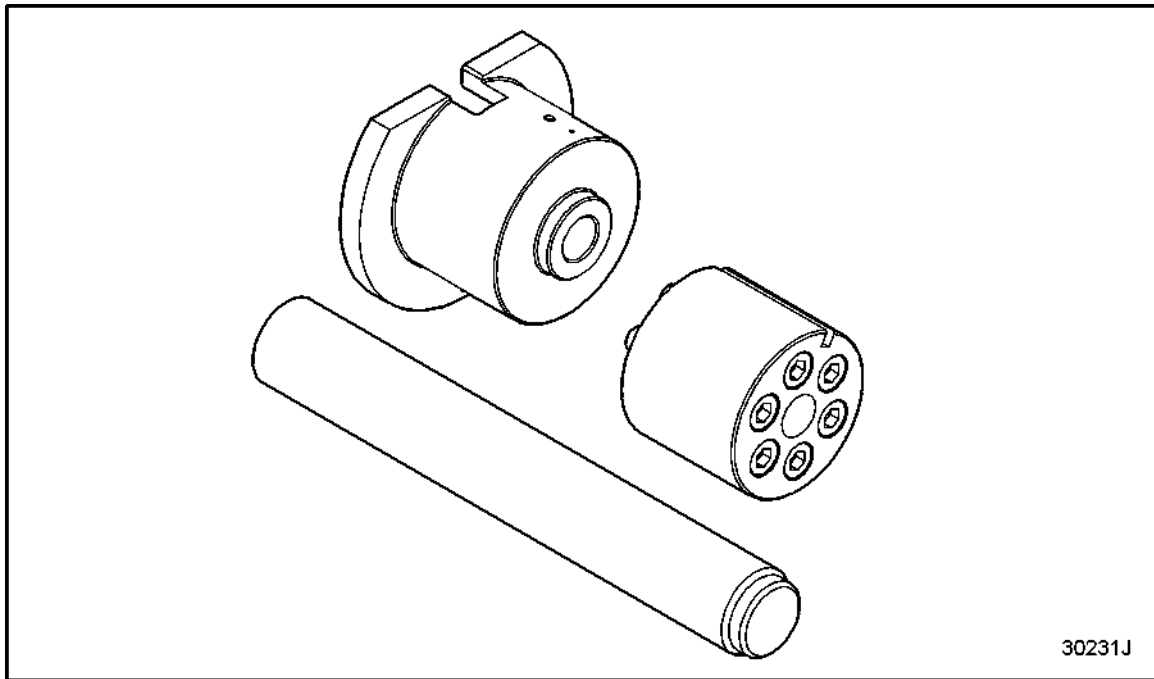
Rear Crankshaft Flange Installer,J 42733
